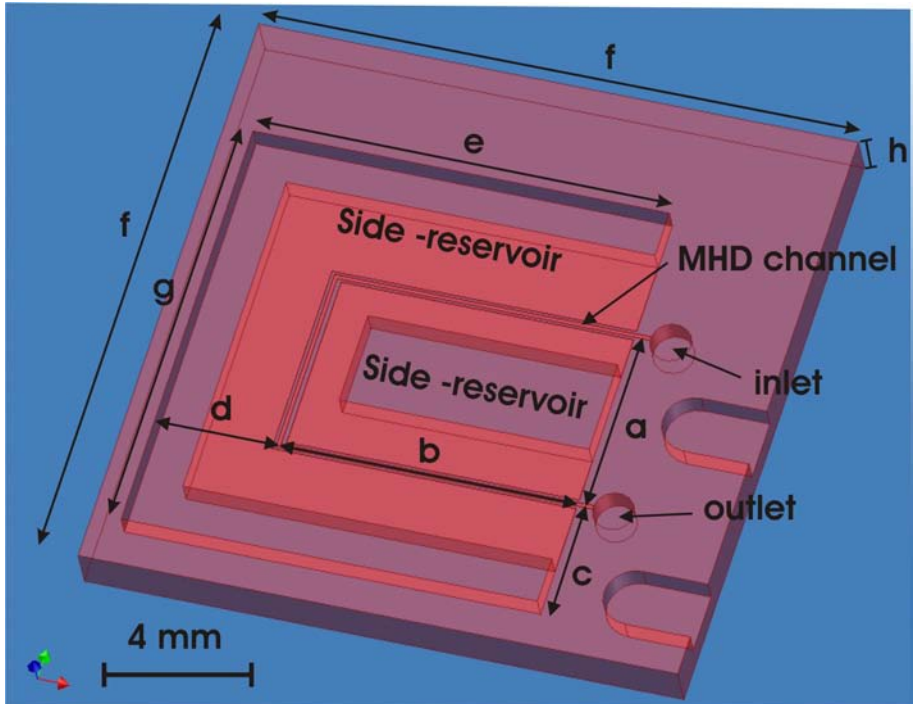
Three dimensional drawing of the MHD pump (Drawing courtesy of F. Lucklum). The dimensions of the chip and side reservoirs were:  $a = 4$  mm,  $b = 6$  mm,  $c = 2.45$  mm,  $d = 2.4$  mm,  $e = 8.4$  mm,  $f = 12.65$  mm,  $g = 8.95$  mm,  $h = 1$  mm. We measured the dimensions on a processed chip, with a precision of  $\pm 0.05$  mm.
